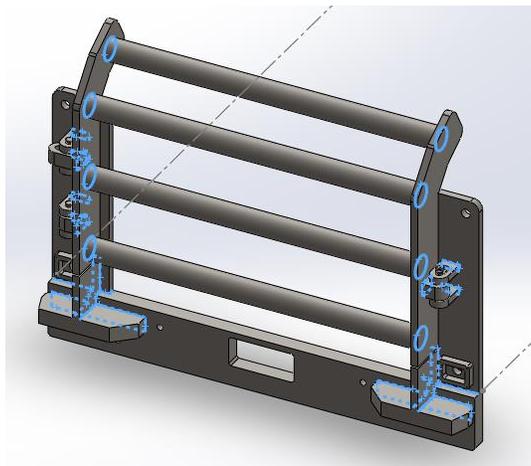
Final Design Rear Protection Systems Weld Seams
